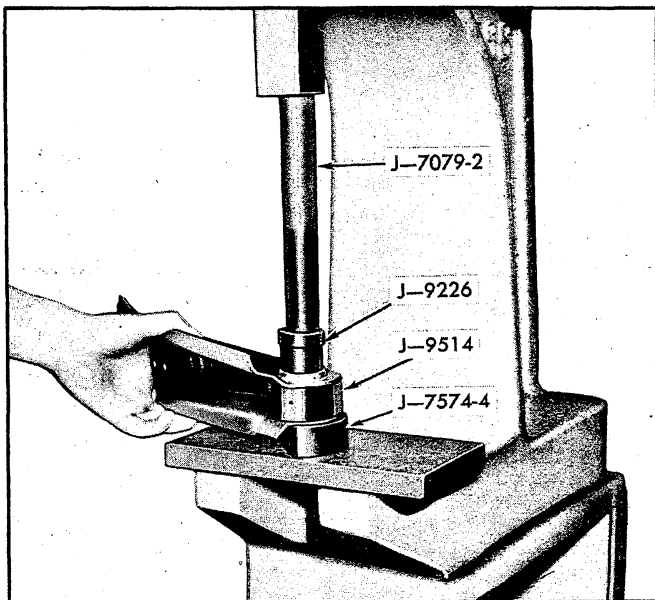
Removing Lower Control Arm Pivot Bushing - Chevy II
